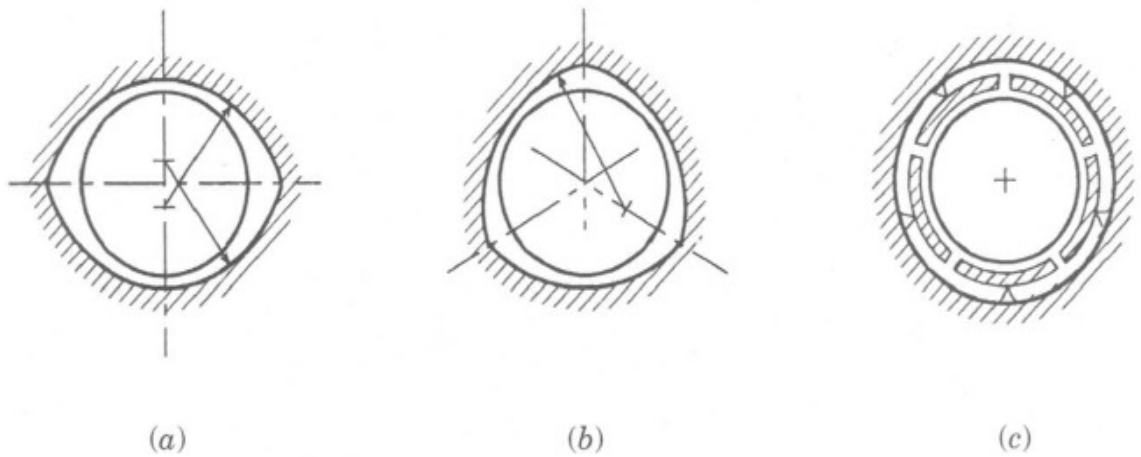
Non circular bearings: (a) two lobe bearing with a lemon shape; (b) three lobe bearing; (c) tilting-pad bearing [43].
